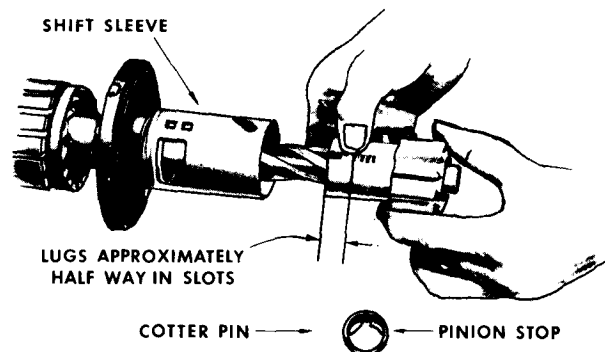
Procedure of reassembling pinion, pinion guide, and spring in Dyer drive assembly.
